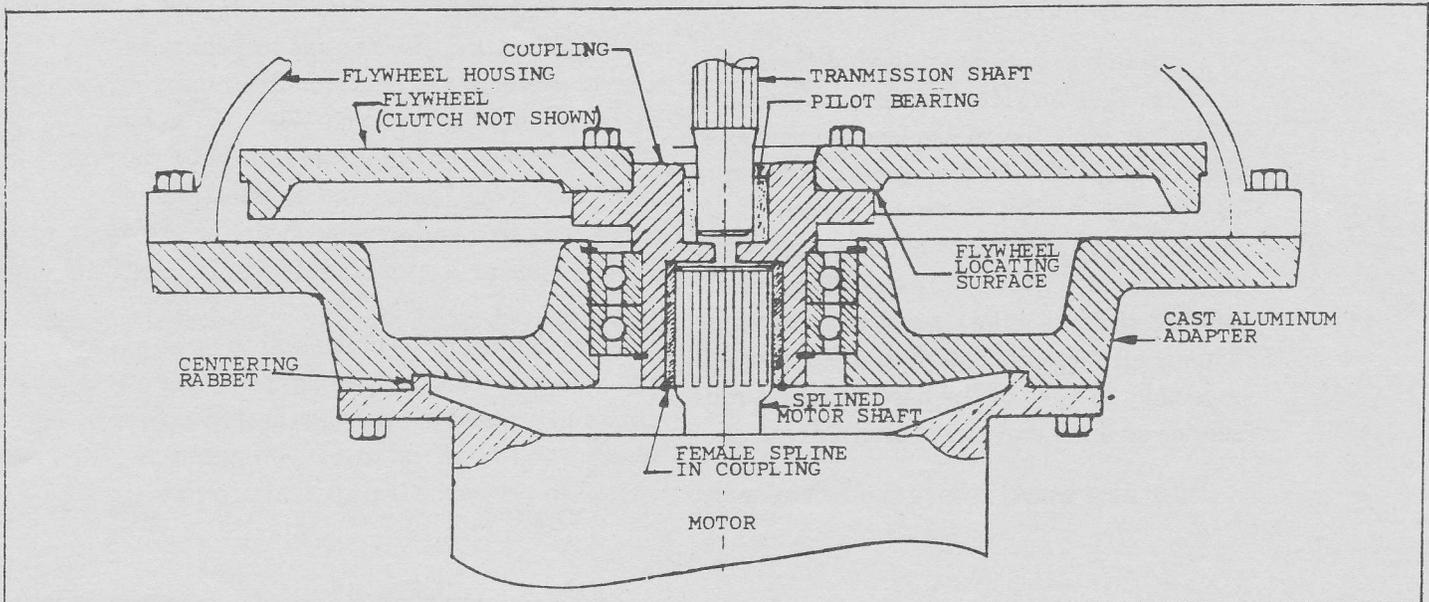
Top view cross section of motor mounted to flywheel housing with cast aluminum adapter with coupling and flywheel supported by bearings.
